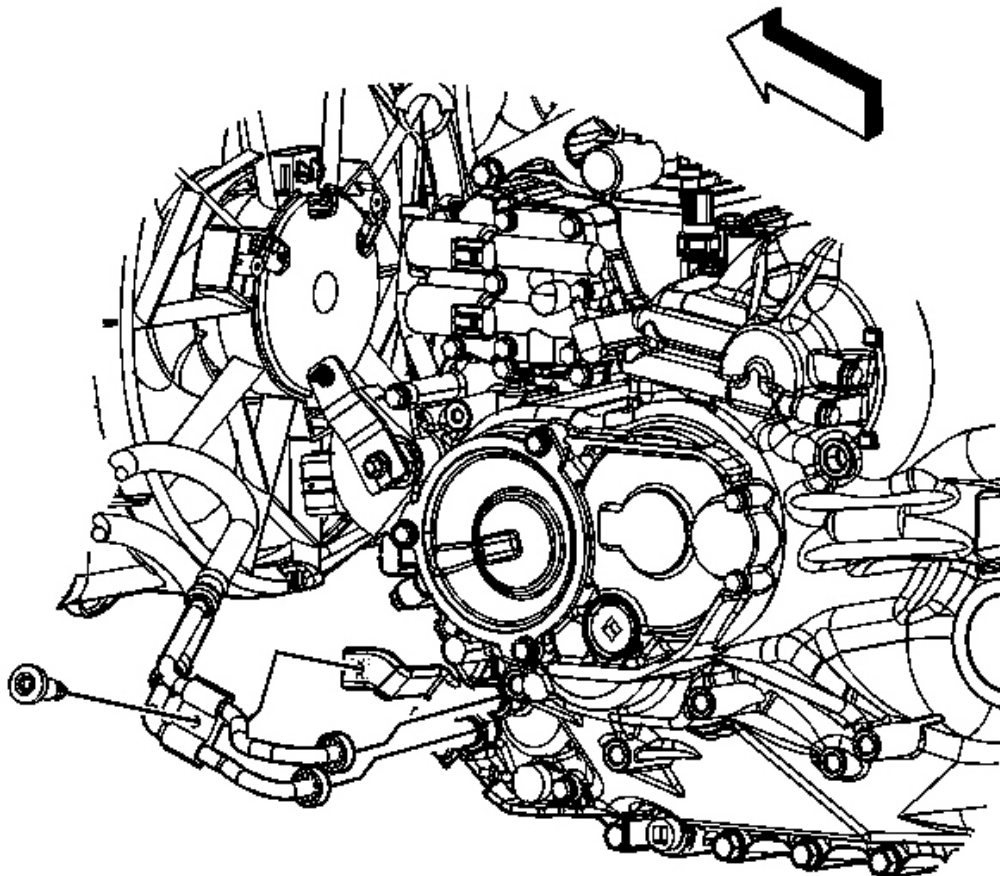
Installing Oil Cooler Pipe Fitting & Seal
